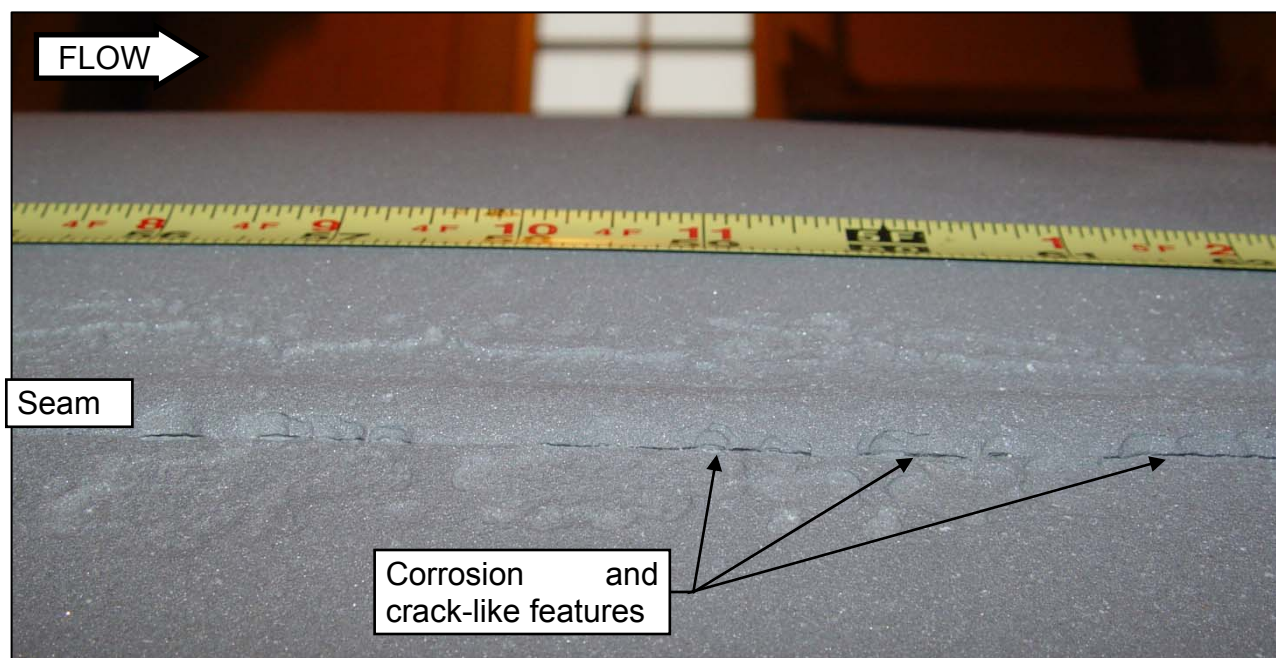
Oblique view of the longitudinal seam in joint 217730 showing typical corrosion and crack-like features at the toe of the weld.
